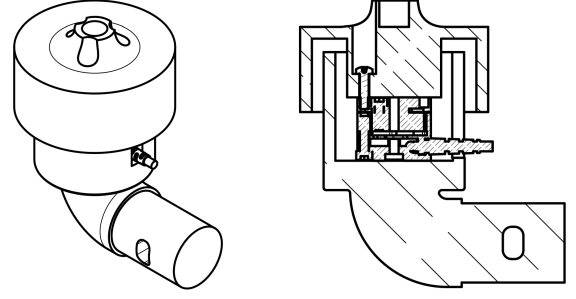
Custom 3D-printed load cell adaptor and environmental shield. (a) Perspective view of the two-piece enclosure. (b) Section view detailing the 4 mm air gap isolating the load cell body.
